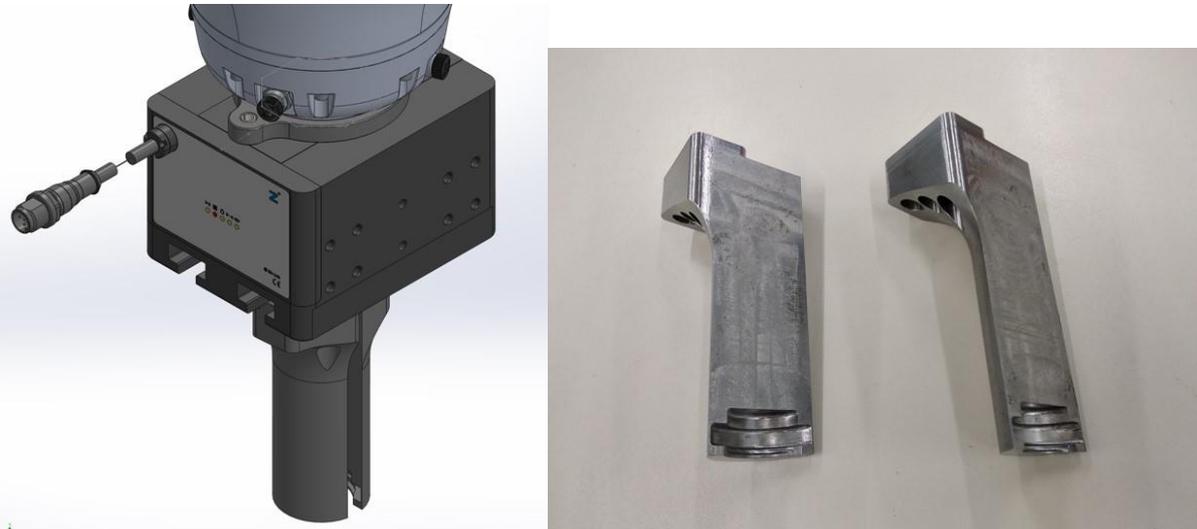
Gripper CAD and Claws details (from HRC LAB CRF)
